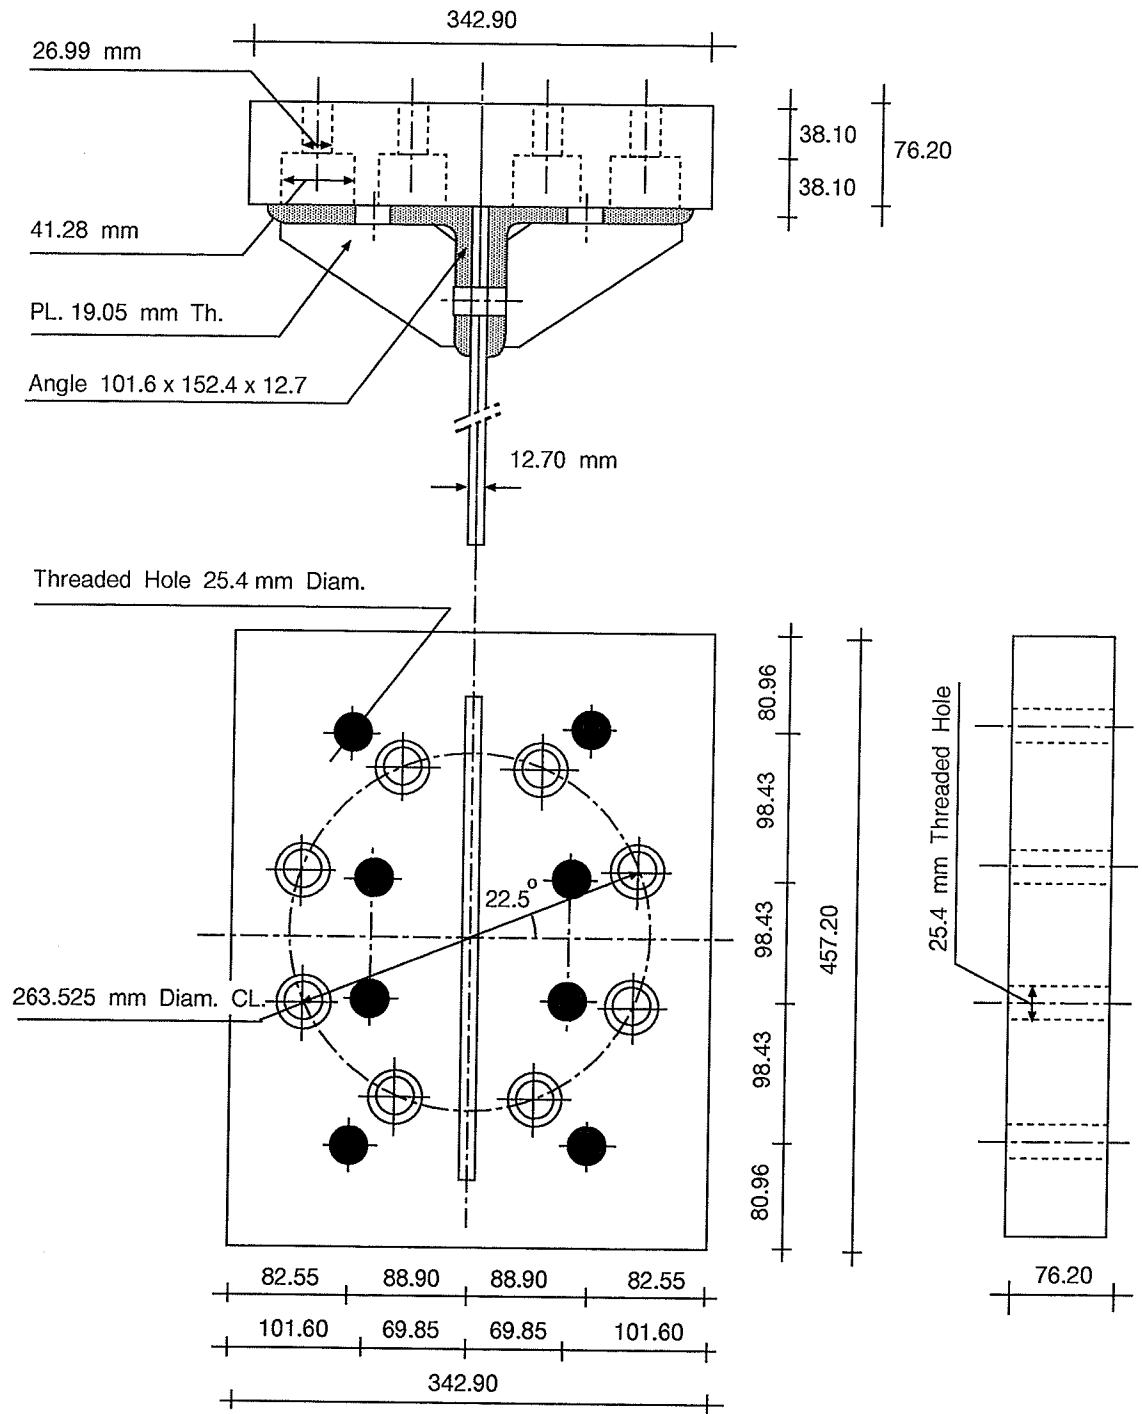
Details of Top Plate Used with Test Setup # 2.
